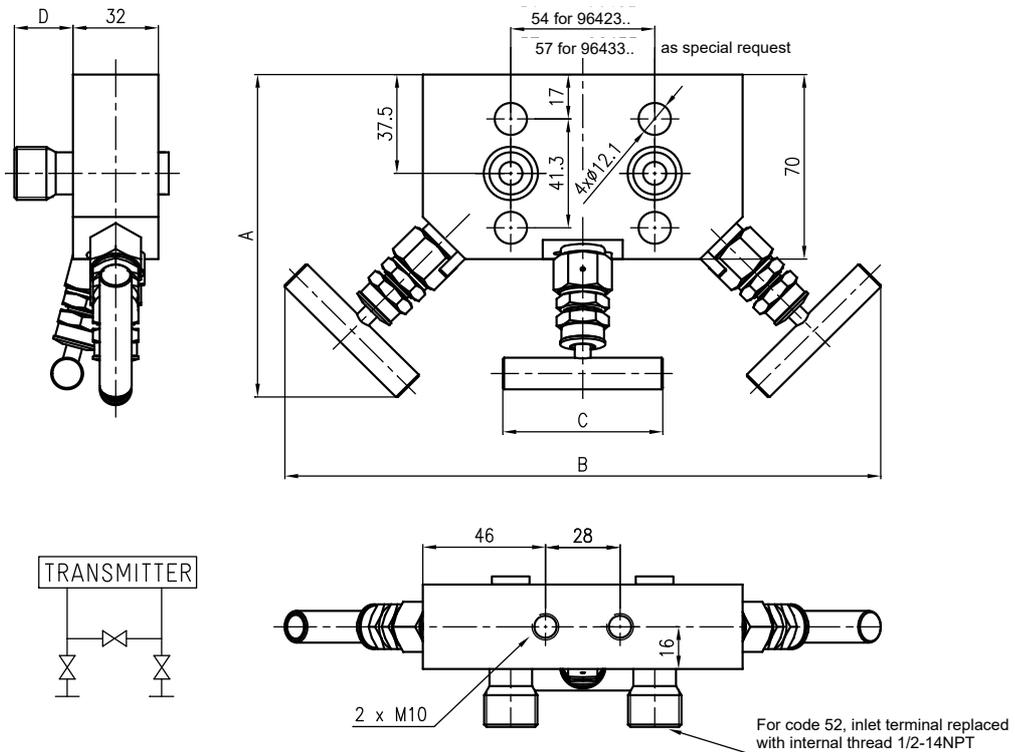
Two-way manifold (964 41..), dimensional drawing, scheme
